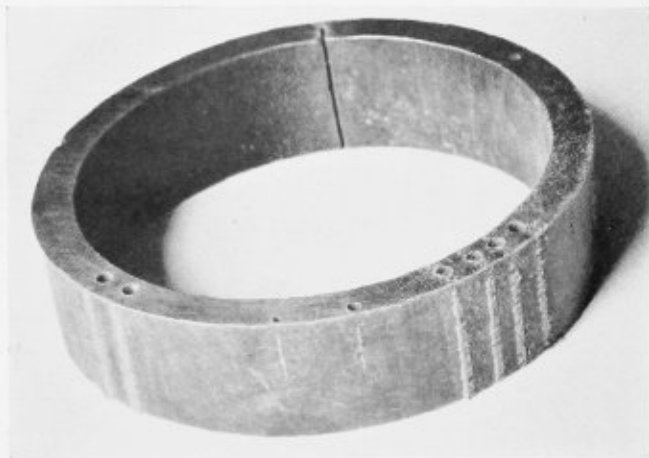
Specimen having hidden defects, discovered by Magnaflux process of inspecting welds
